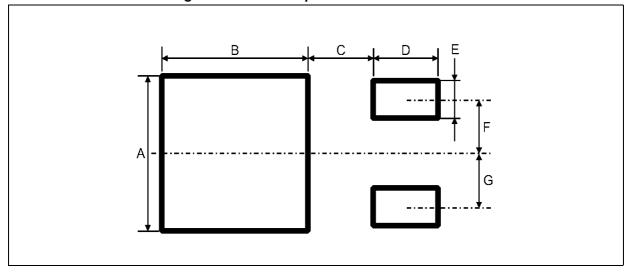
Drawing dimension DPAK (type IDS-subcon.)
